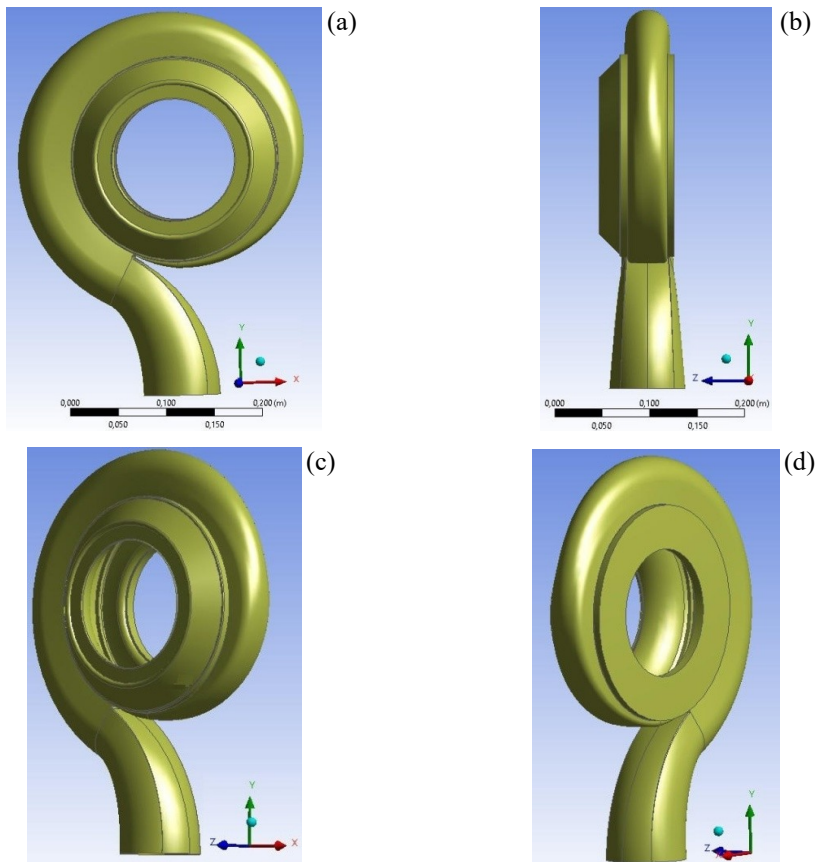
3D assembled geometric reproduction of the HA SS PAT: (a) front view, (b) back view
